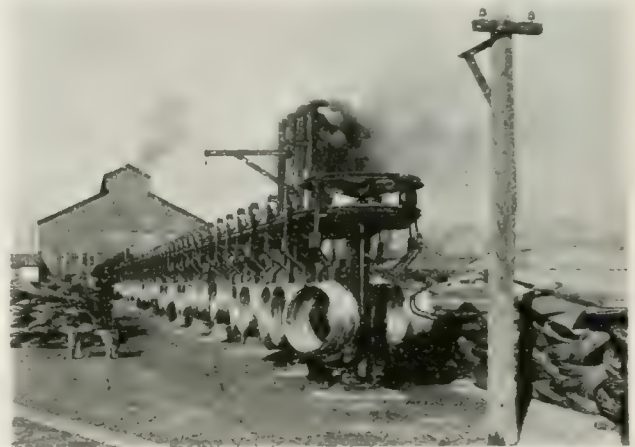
ROD AND WIRE COOLING CONVEYOR
